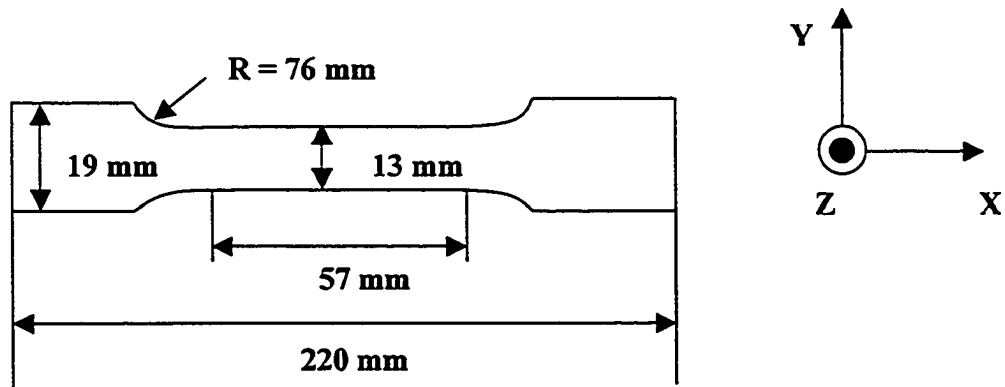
Geometry and dimensions of the specimens for tensile and fatigue tests.
